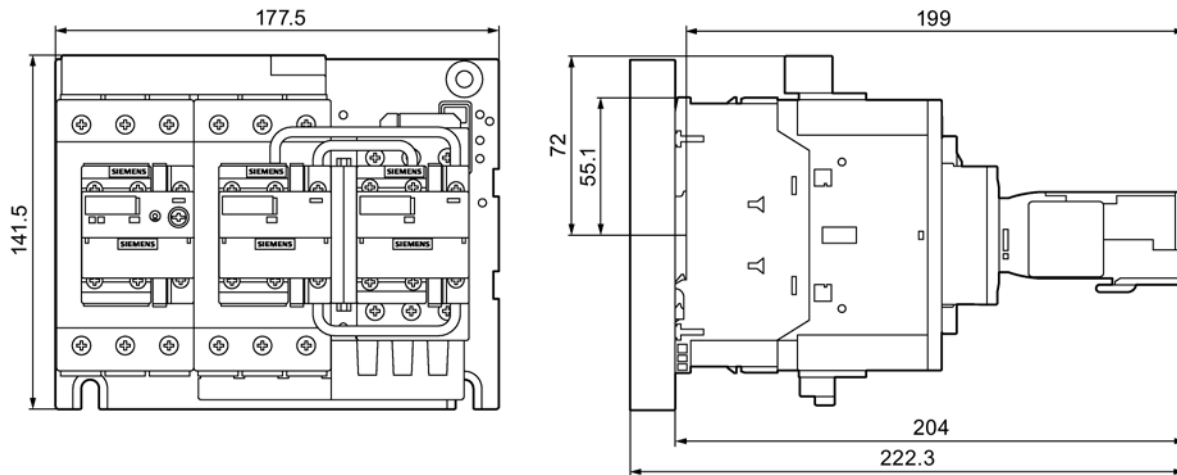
Contactor assembly for star-delta (wye-delta) start S2-S2-S0 on mounting plate
